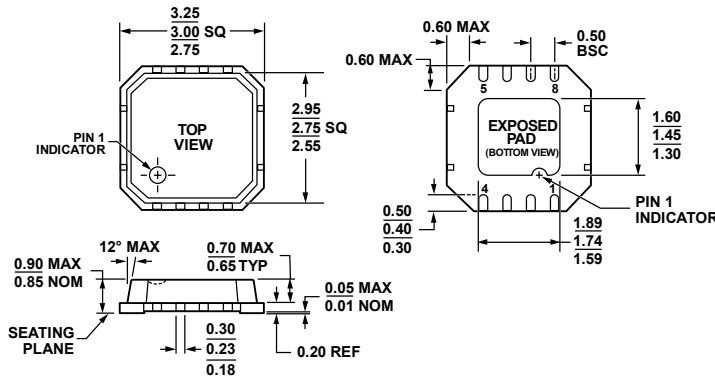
8-Lead Lead Frame Chip Scale Package [LFCSP\_VD] 3 mm x 3 mm Body, Very Thin, Dual Lead (CP-8-2)—Dimensions shown in millimeters
